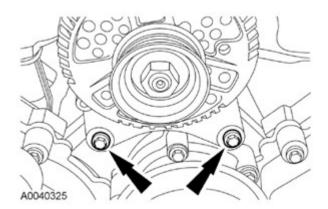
Removing Generator Lower Mounting Bolts Courtesy of FORD MOTOR CO.
